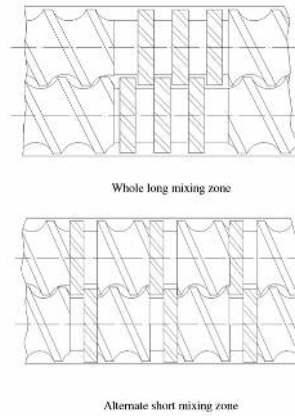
Two kinds of the arrangement of gear type mixing screw elements
